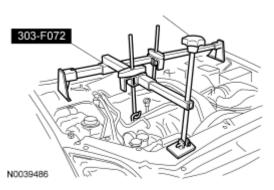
Identifying Special Tool (303-F072) Courtesy of FORD MOTOR CO.
